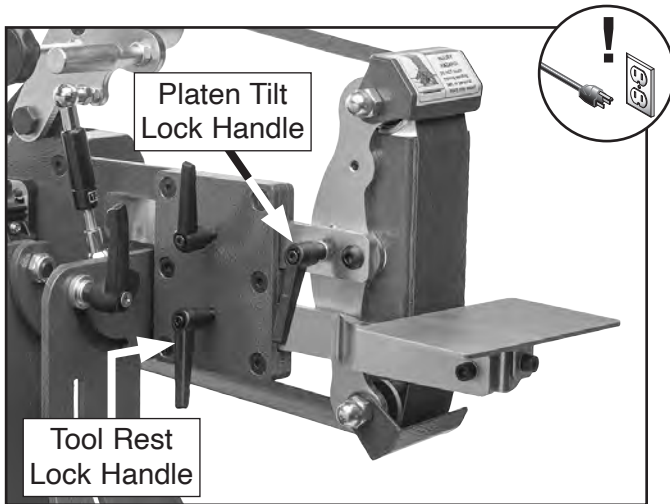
Location of tool rest lock handle and platen tilt lock handle.
